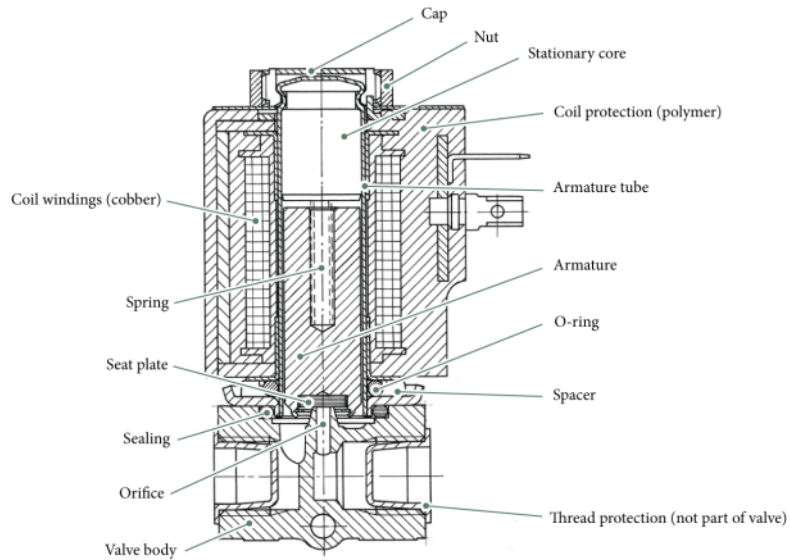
A cross section of a typical industrial valve. The valve is closed. The coil is mounted on the Armature Tube. Note the seat plate at the end of the Armature. The seat plate is a gasket which is pressed down on the orifice in the valve body, thereby sealing off the valve. Once the coil is energised, the armature will move upwards, towards the stationary core inside the top of the armature tube, while compressing the spring. This valve operates without a diaphragm, contrary to the valve in figure 5.30.
